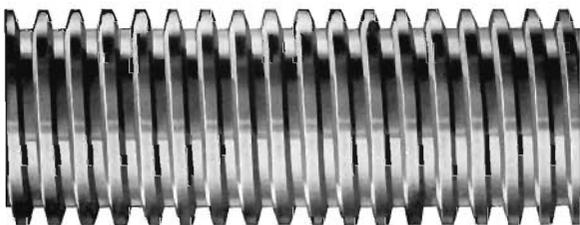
Section of Acme Thread Lead Screw (actual size) used on the 16-inch South Bend Lathe.
